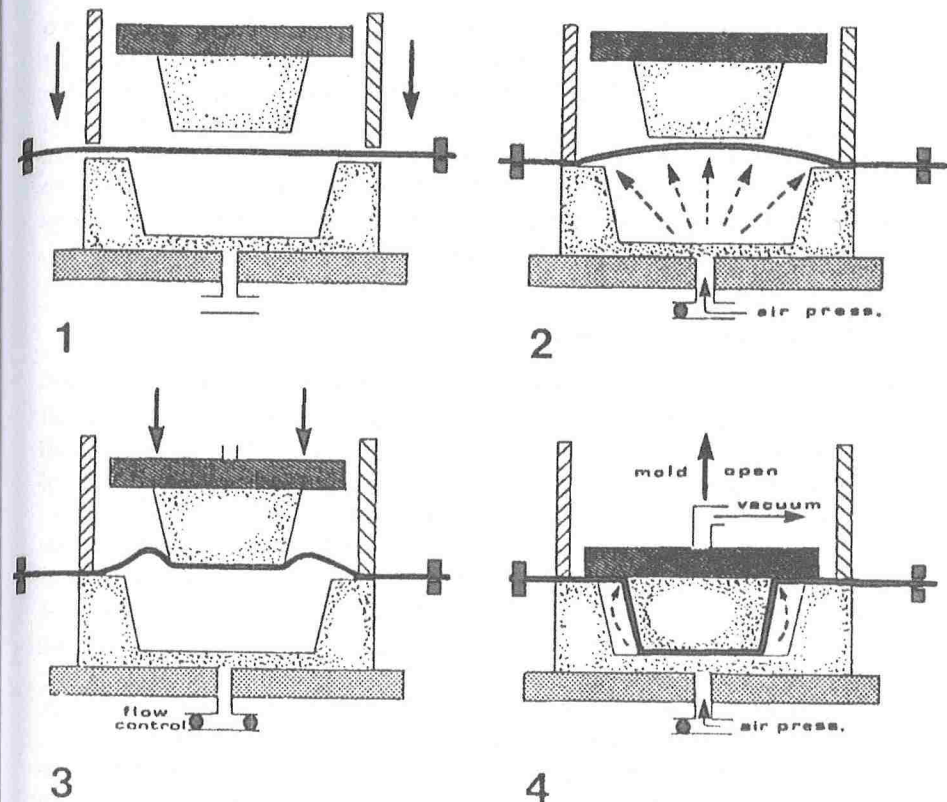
Pressure bubble snapback forming: (1) preheated sheet clamping; (2) prestretching of sheet; (3) mold closing; (4) pressure forming over male mold.
